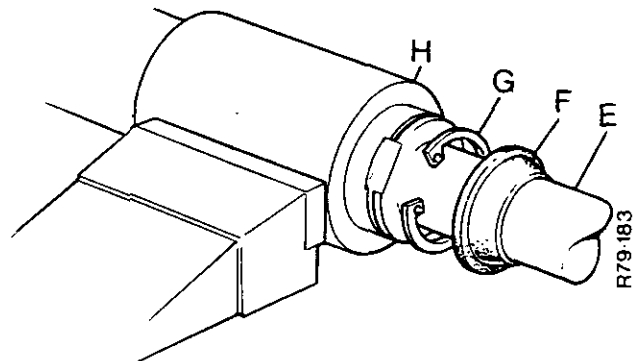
ASSEMBLY OF THE SUPPORT RAM
